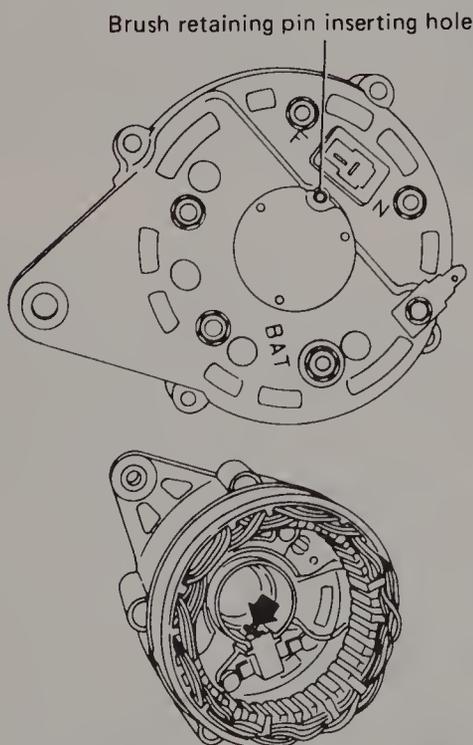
A piece of wire inserted through the hole in the cover will hold the brushes in the retracted position as the alternator is reassembled (Sec 20)
